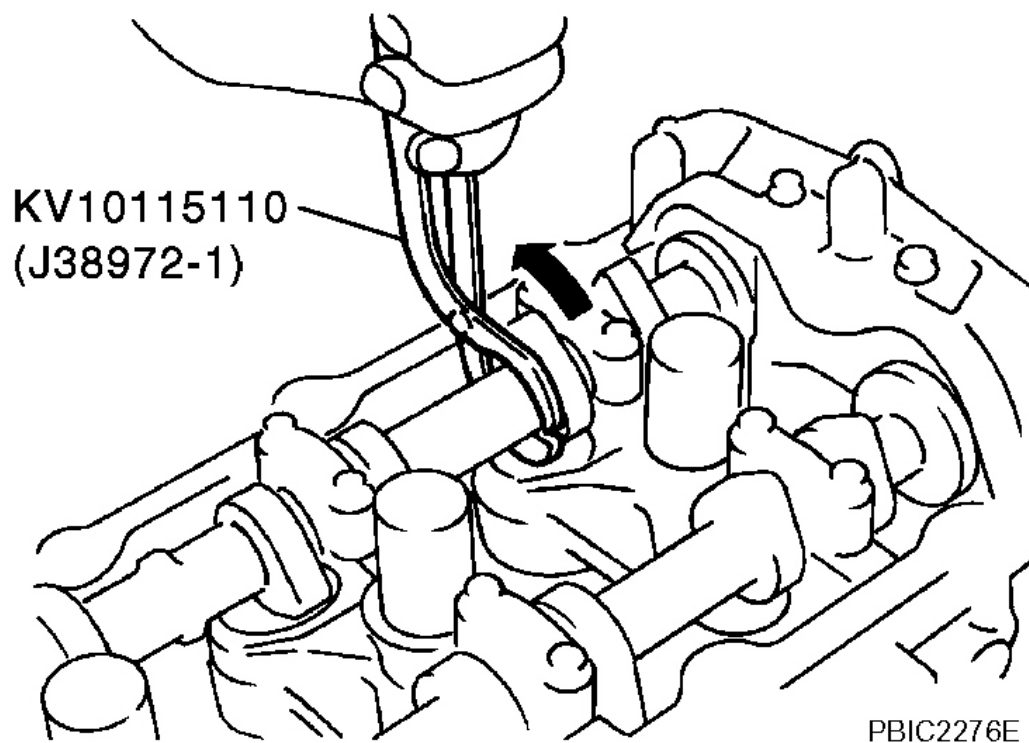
Placing Camshaft Pliers (SST) Around Camshaft
